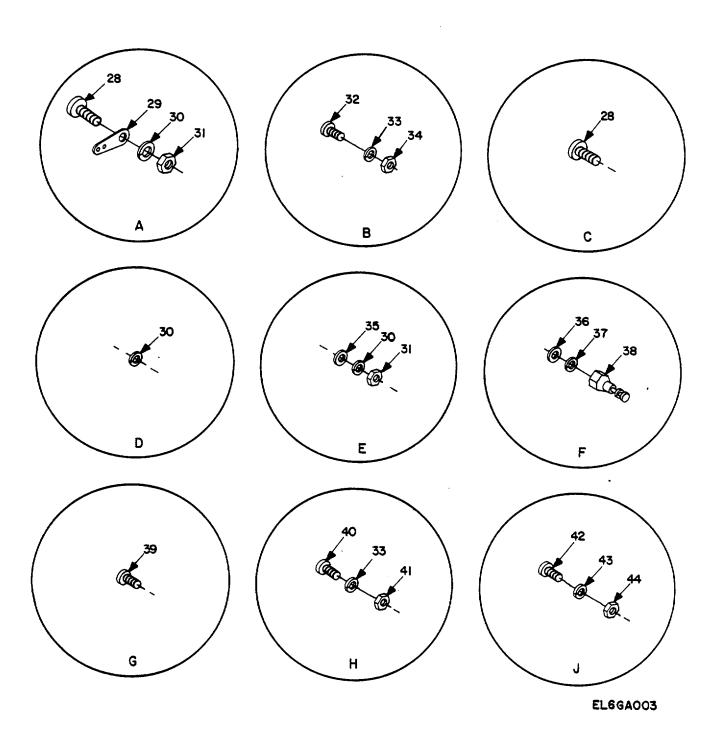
Panel Assembly B4003749 (Sheet 2 of 2).
